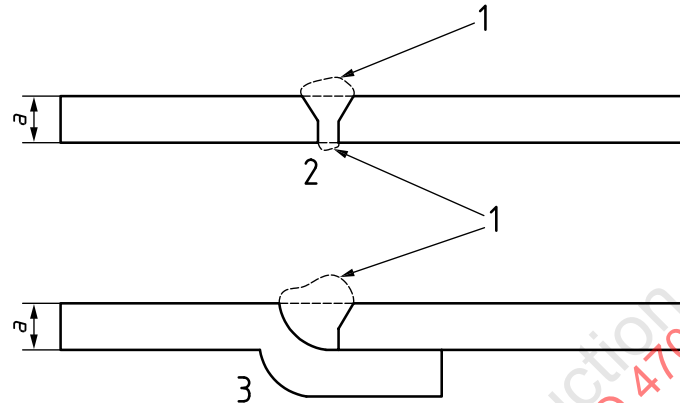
Test specimen for tensile test perpendicular to the weld
